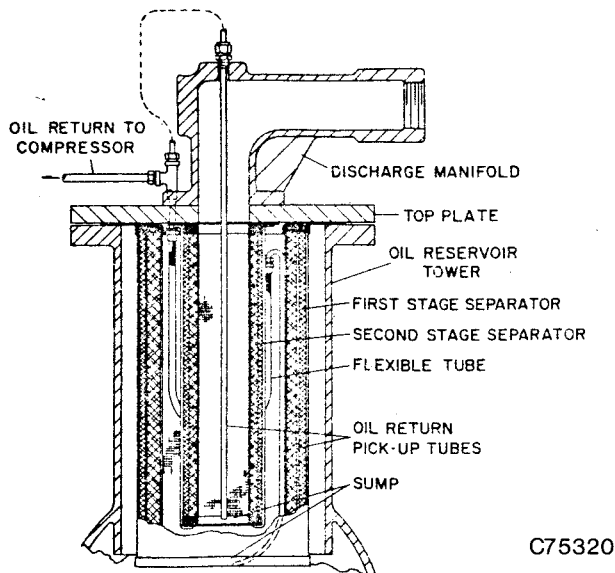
DUAL-ELEMENT OIL SEPARATOR
